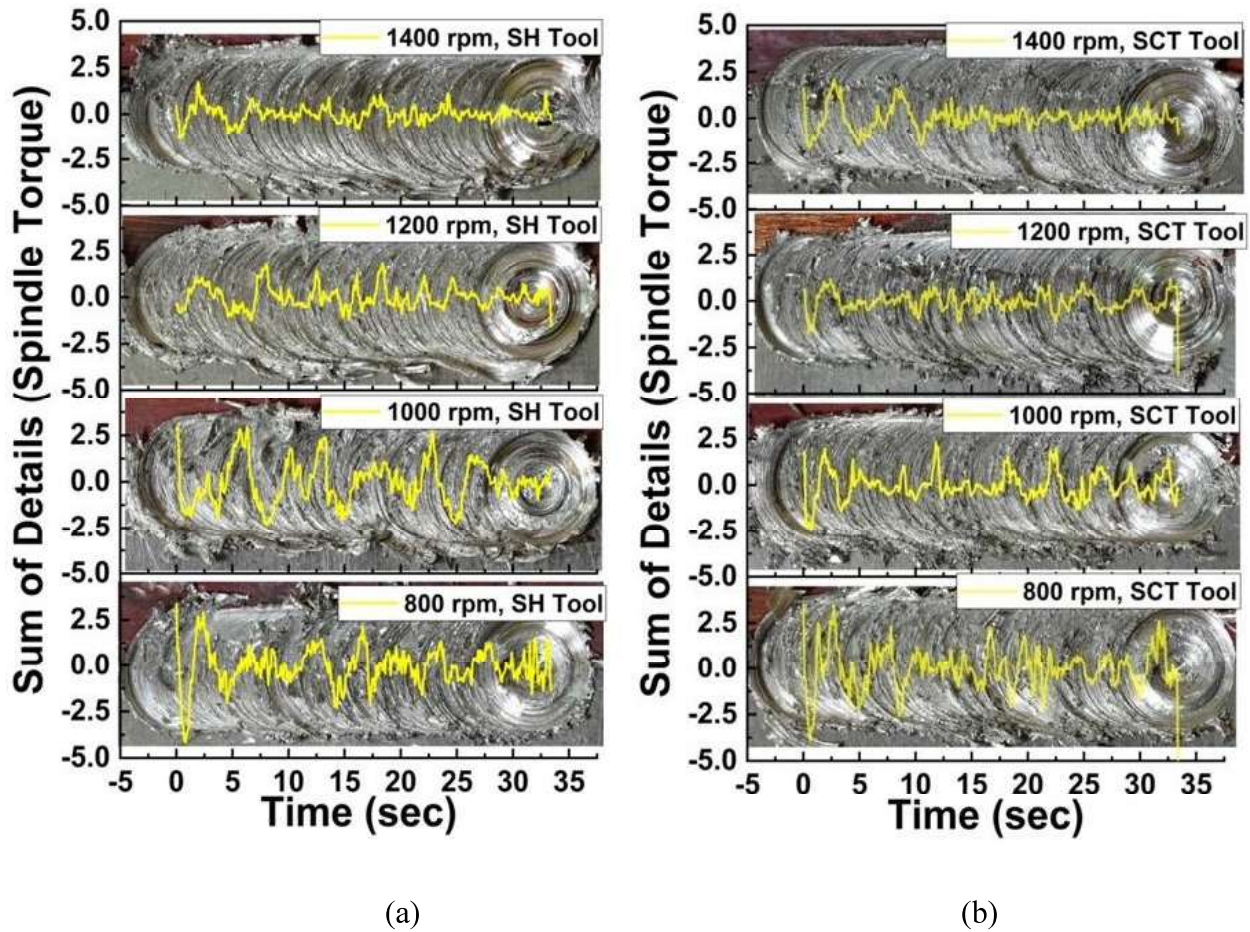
Variation in weld bead appearance with respect to Sum of details (spindle torque) (a) SH tool, (b) SCT tool
